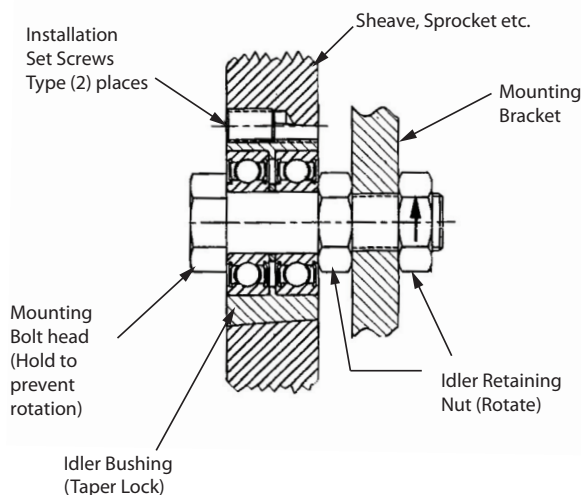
Preferred Assembly TAPERLOCK Bushings
